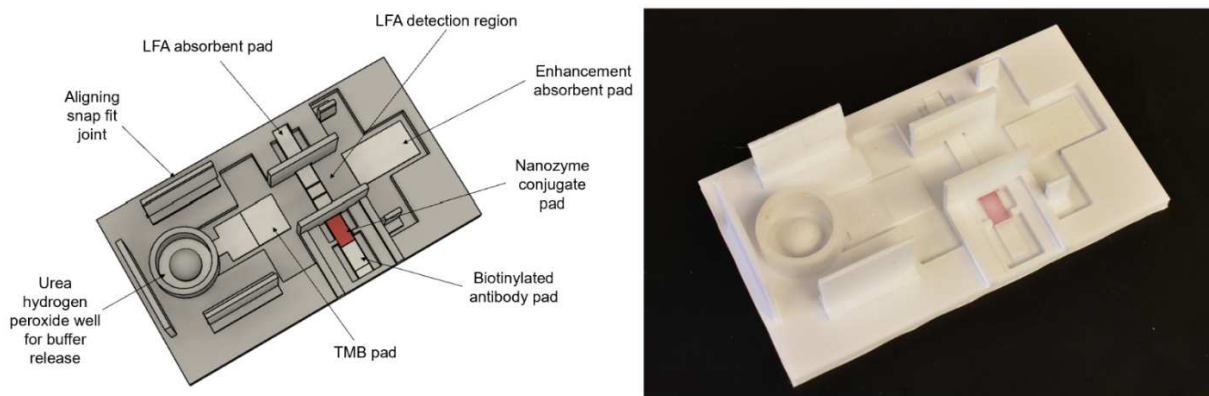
Overview of the bottom piece of casing. (Left) Labelled CAD drawing of bottom piece of casing. (Right) Photograph of 3D printed bottom piece of casing with LFA test strip and enhancement reagent paper pads in position.
